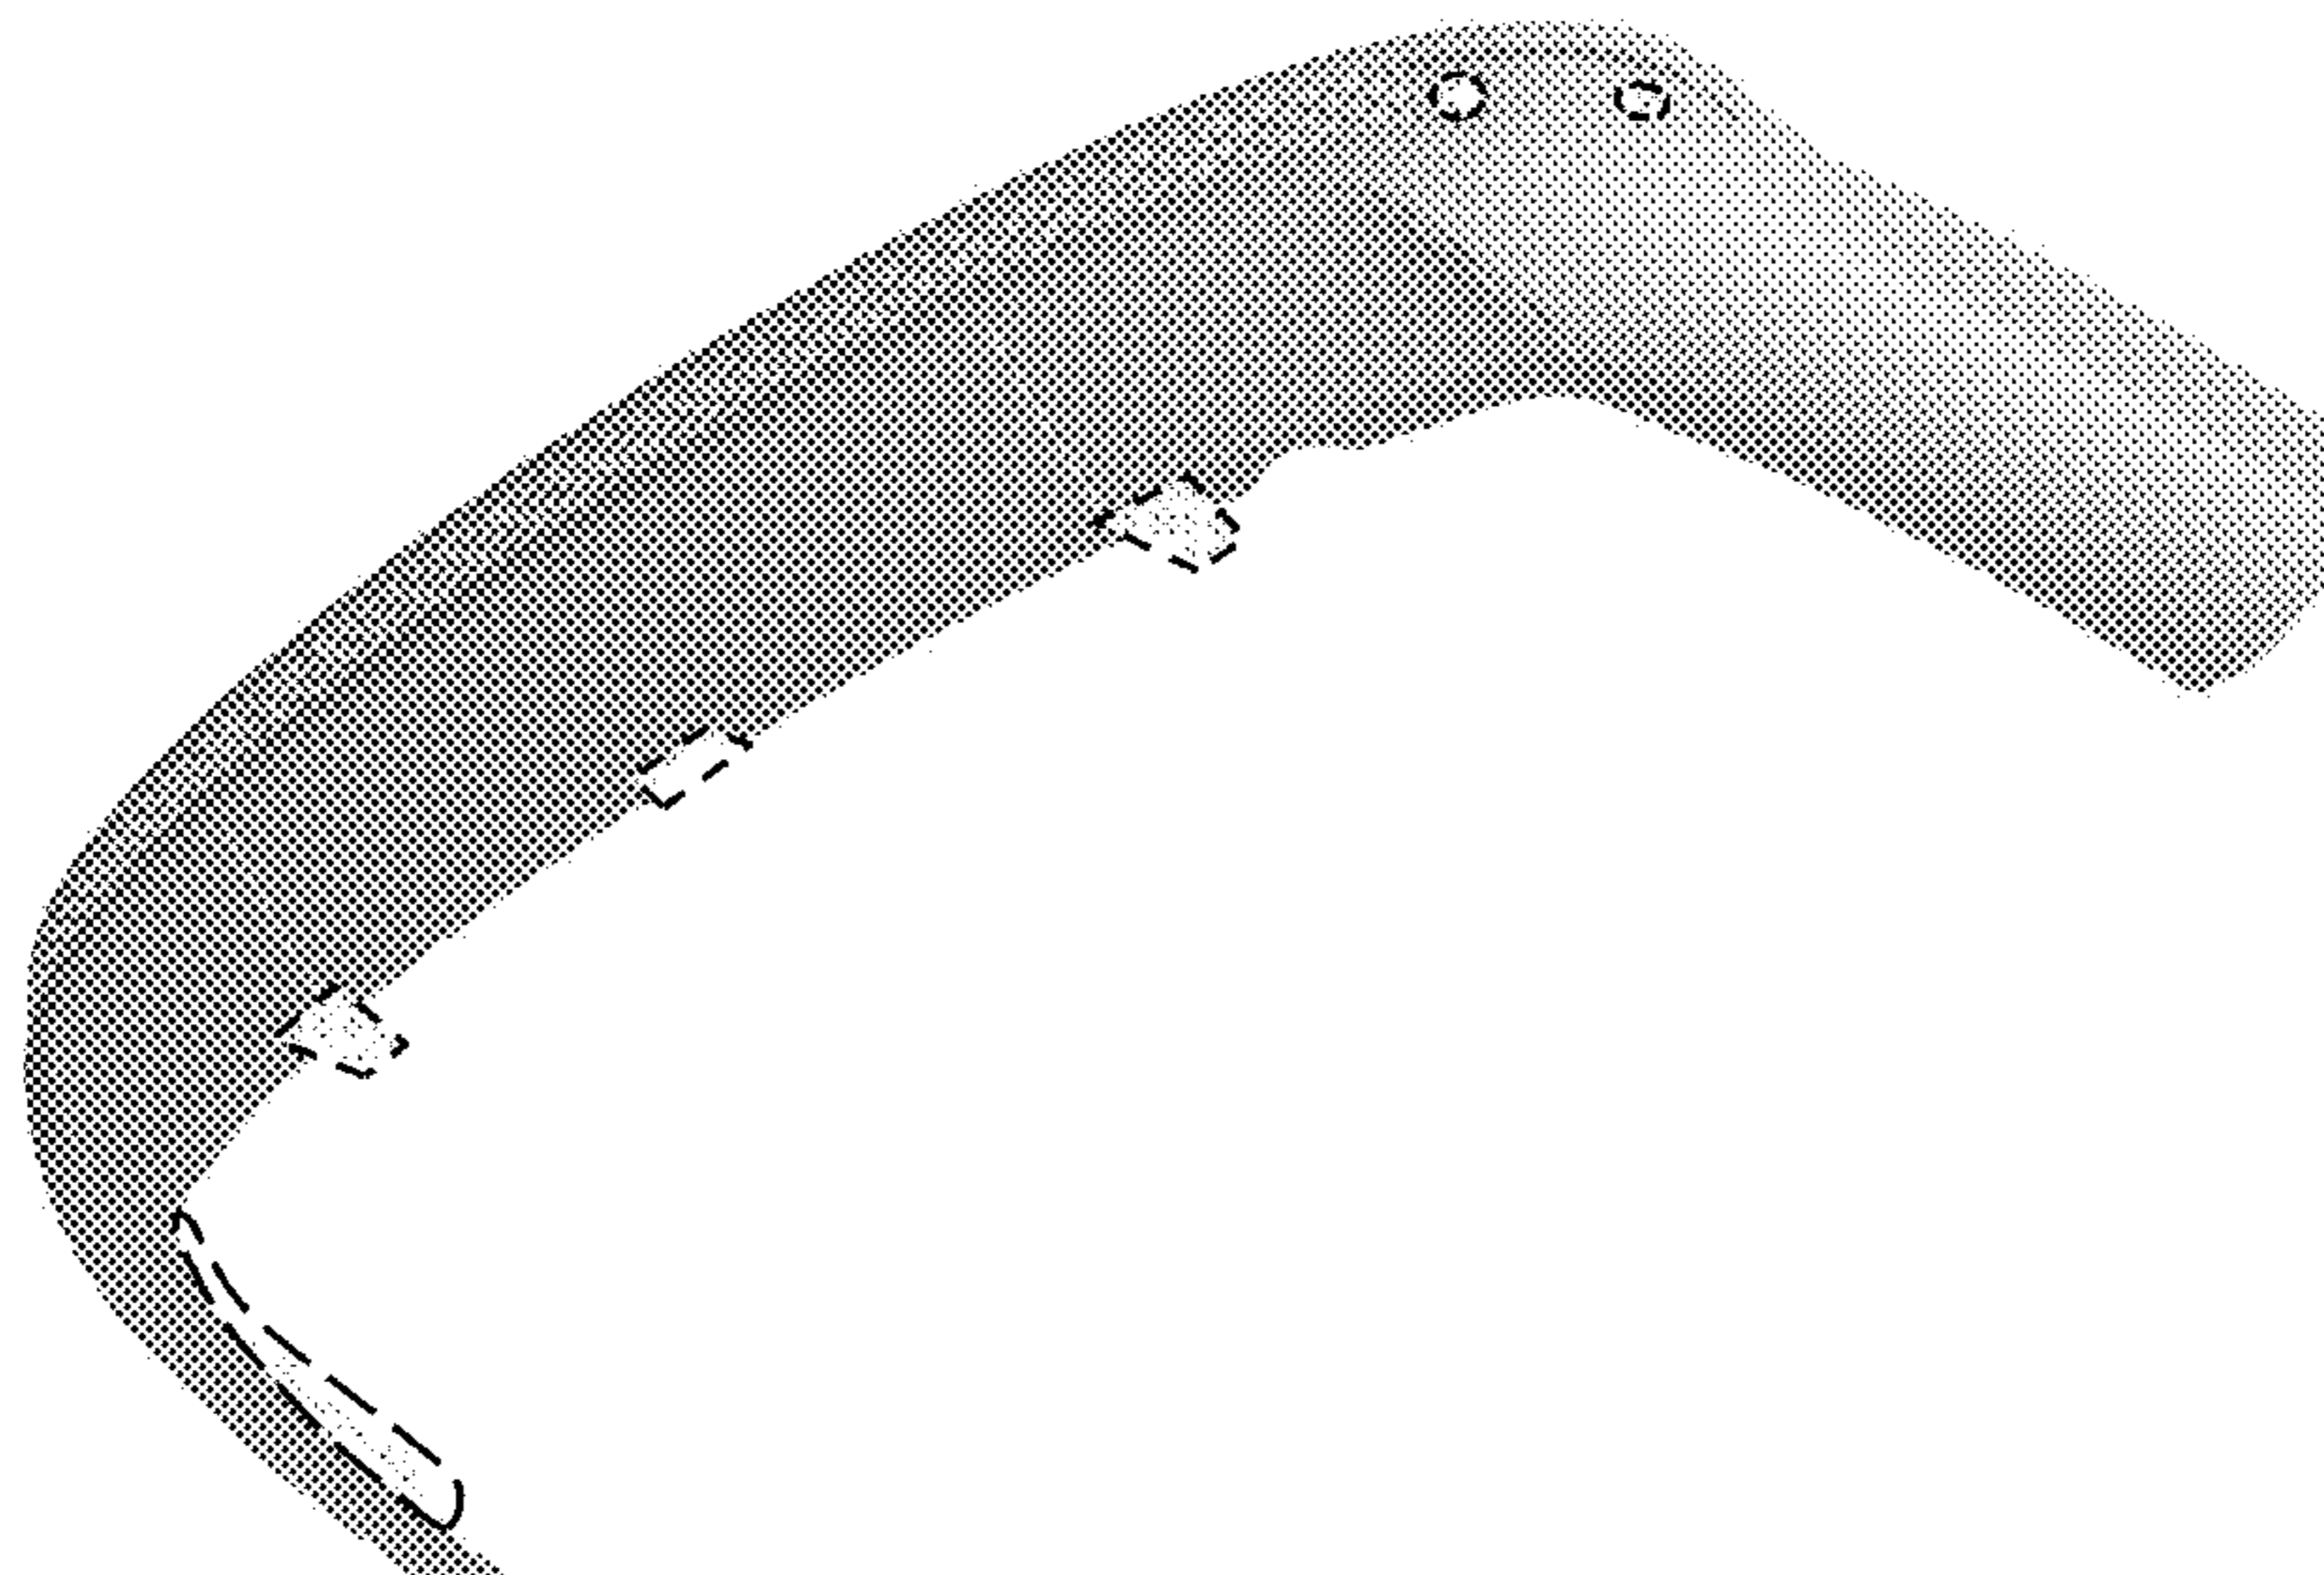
is a right side elevational view of the vehicle rear lower bumper cover;
